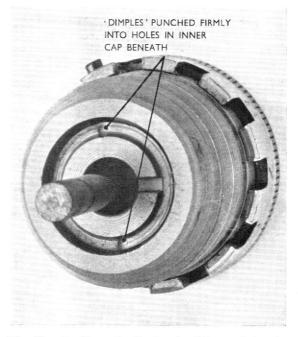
Locking of adjusting head internal details. (The word 'HOLES' should read 'SLOTS')
